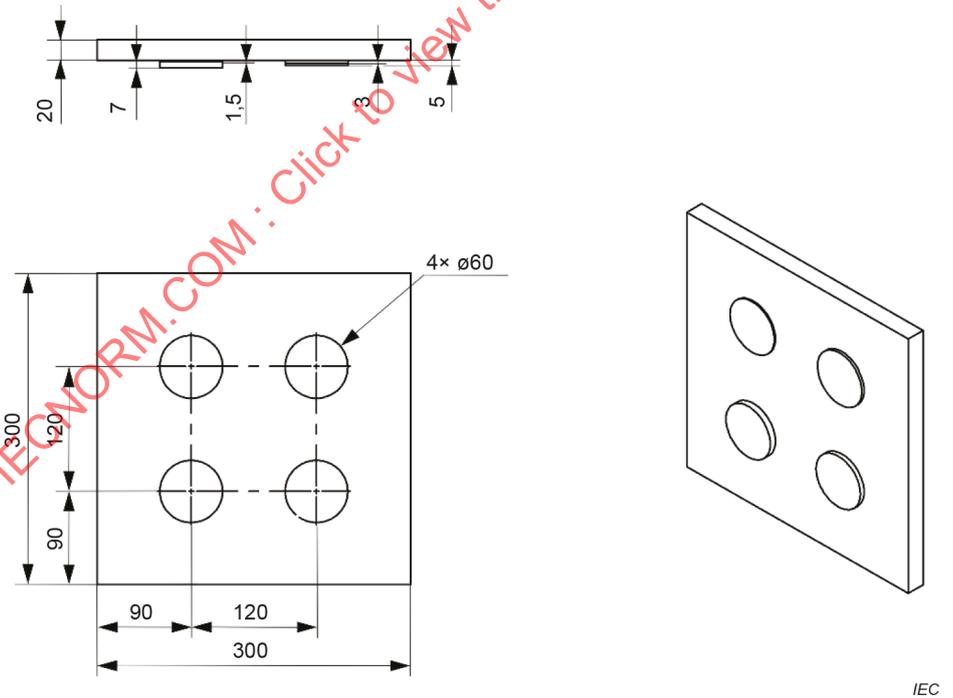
Subassembly of the material detection in air phantom (Figure A.2), mounting sheet
